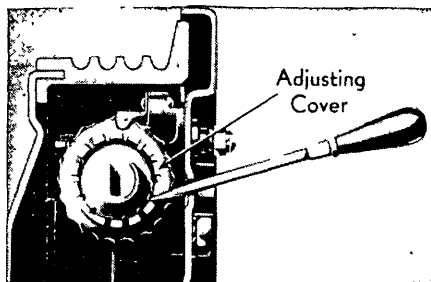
Adjusting Huck-Chevrolet brakes through slot in brake support plate. On 1936-38 cars with enclosed type knee action, front brake is adjusted through hole in brake drum
